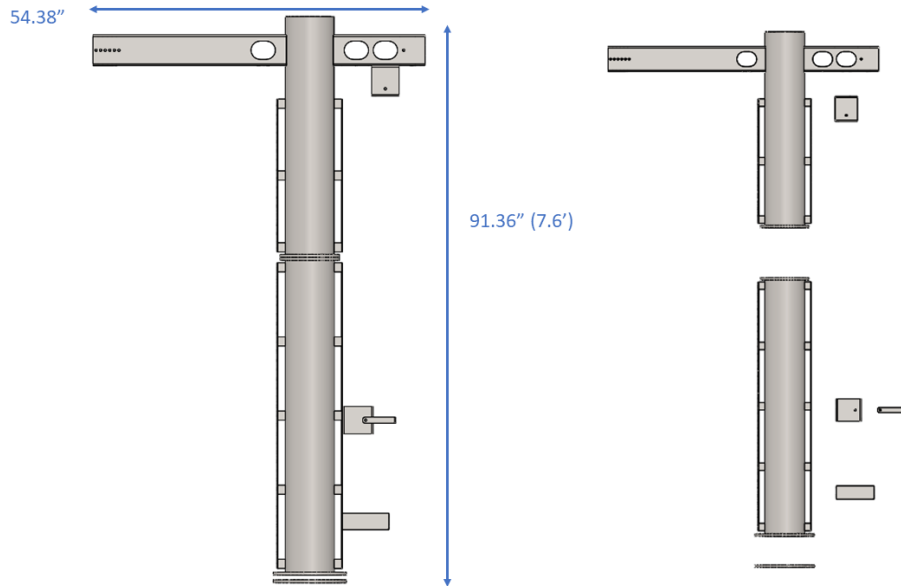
Profile View of Two-Piece Support Crane (Left) and Exploded View Including BWS Bracketry (Right)
